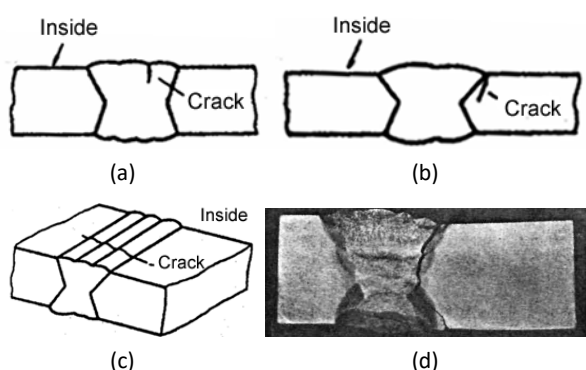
Micro-cracks in HAZ in NIOVAL 47 steel welded joint [13]; a–c) typical positions of longitudinal and transverse cracks on inner vessel wall of tank; d) the macroscopic view of through crack causing leakage.
